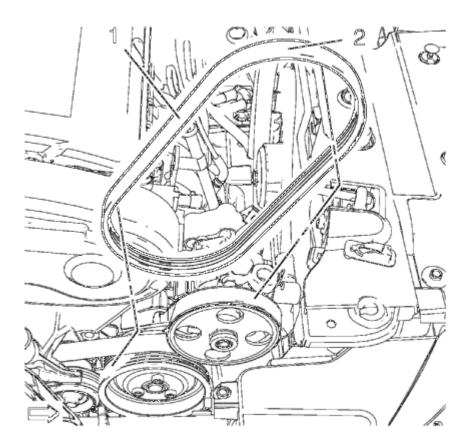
Power Steering Pump Belt Courtesy of GENERAL MOTORS COMPANY
